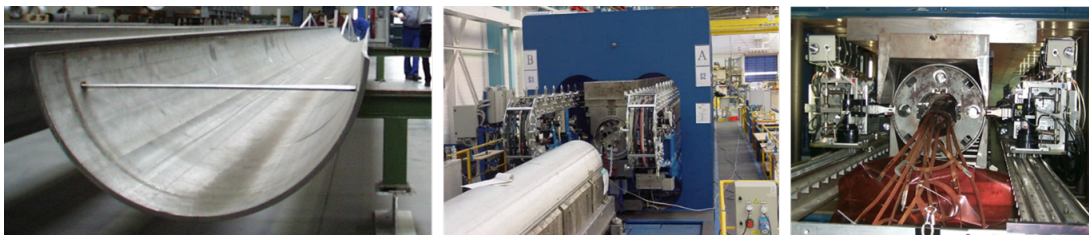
Left: half shrinking cylinder or shell. Center: shell welding for the LHC main dipole. Right: shell welding for the FNAL IR quadrupole magnet.
